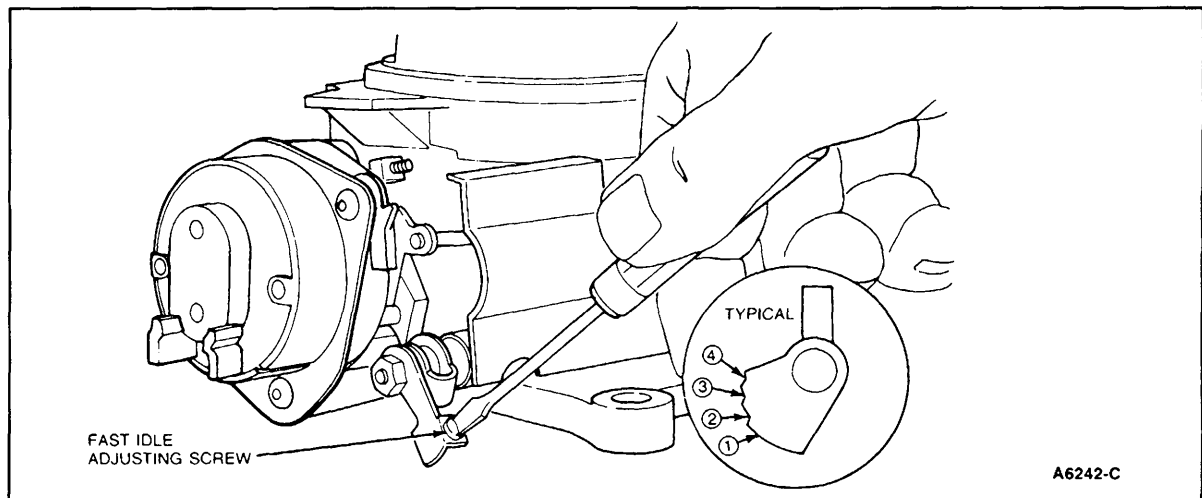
5.8L w/7200-VV Carburetor — Fast Idle RPM Adjustment
